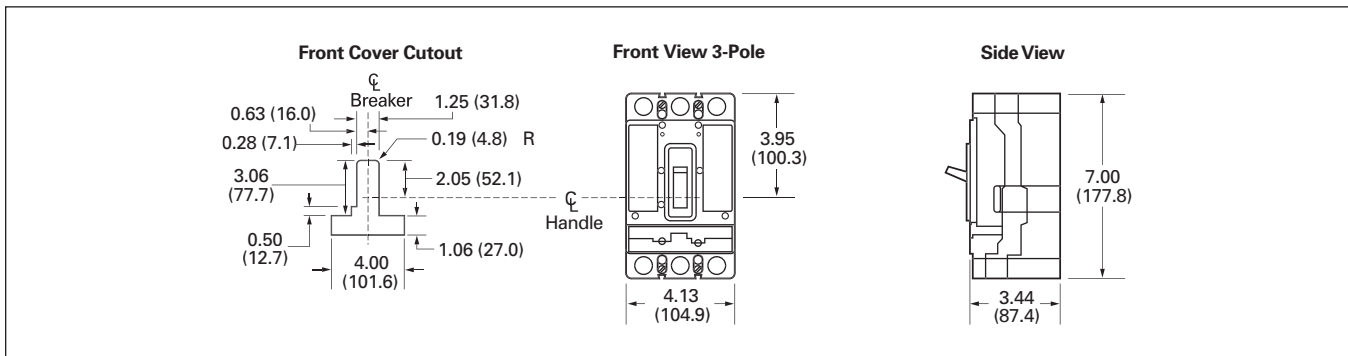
JG-Frame — Dimensions in Inches (mm)
